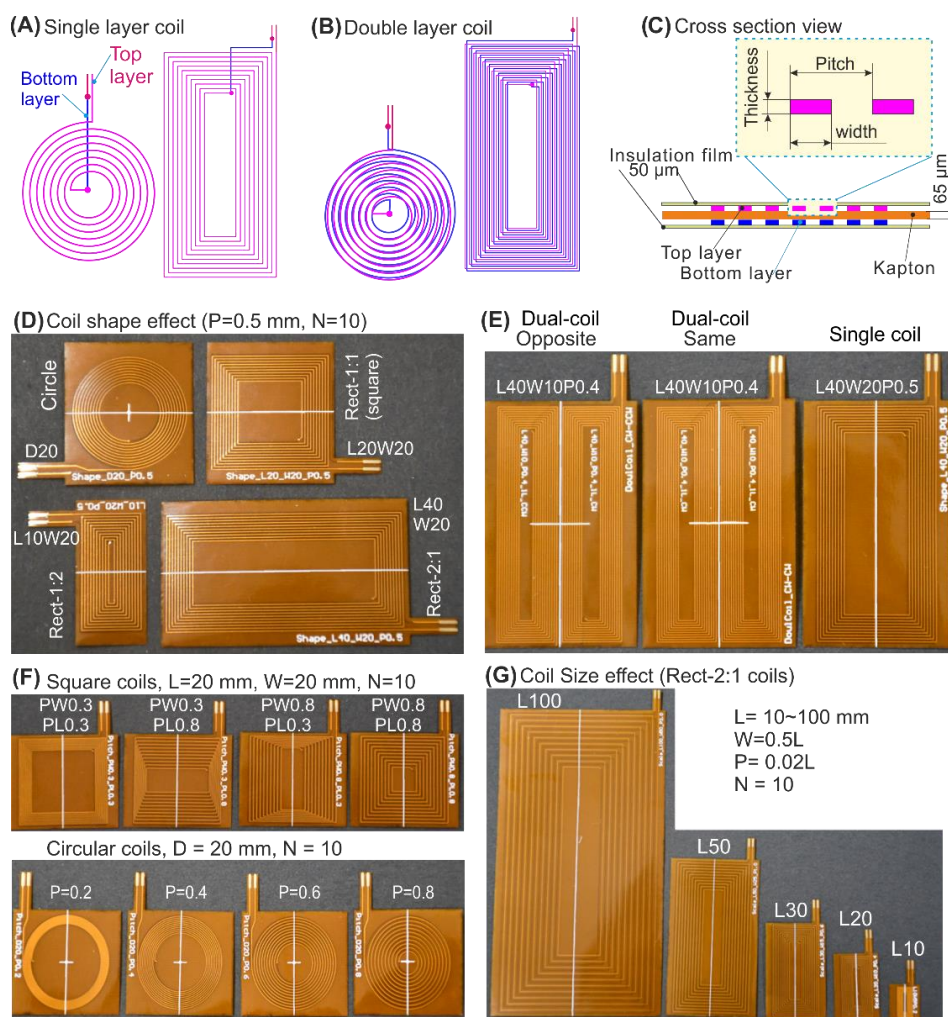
Planar coil design and images of tested FPC coils. (A) Design of single layer coils (circular and rectangle); (B) Design of double layer coils; (C) Cross-section view of double layer FPC coils; (D) Photos of FPC coils with different shapes; (E) Photos of single and dual-coils; (F) Images of coils with the same size but different pitches (square and circular); (G) Rectangular coils with the same design across 10 times scale (100 mm to 10 mm length).
